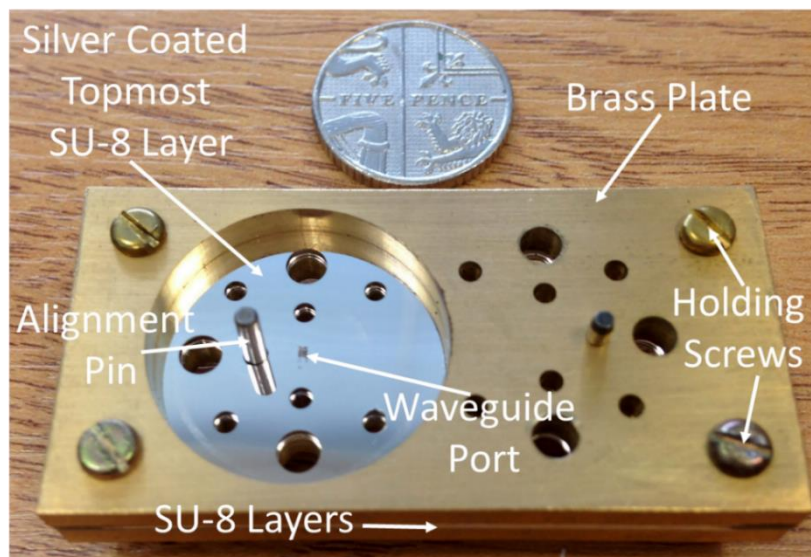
Photograph of the assembled waveguide bend layered structure and adaptor plates
